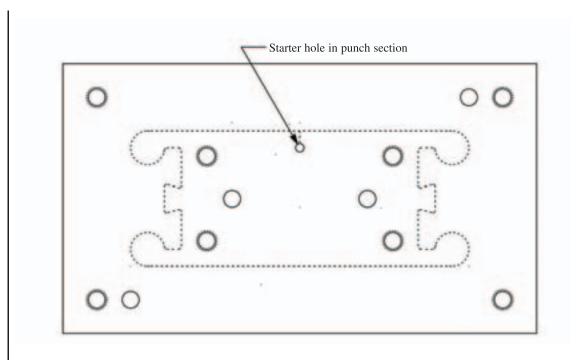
4 Placement of Starter Hole If punch is desired shape, place starter hole in the punch section of the die.
